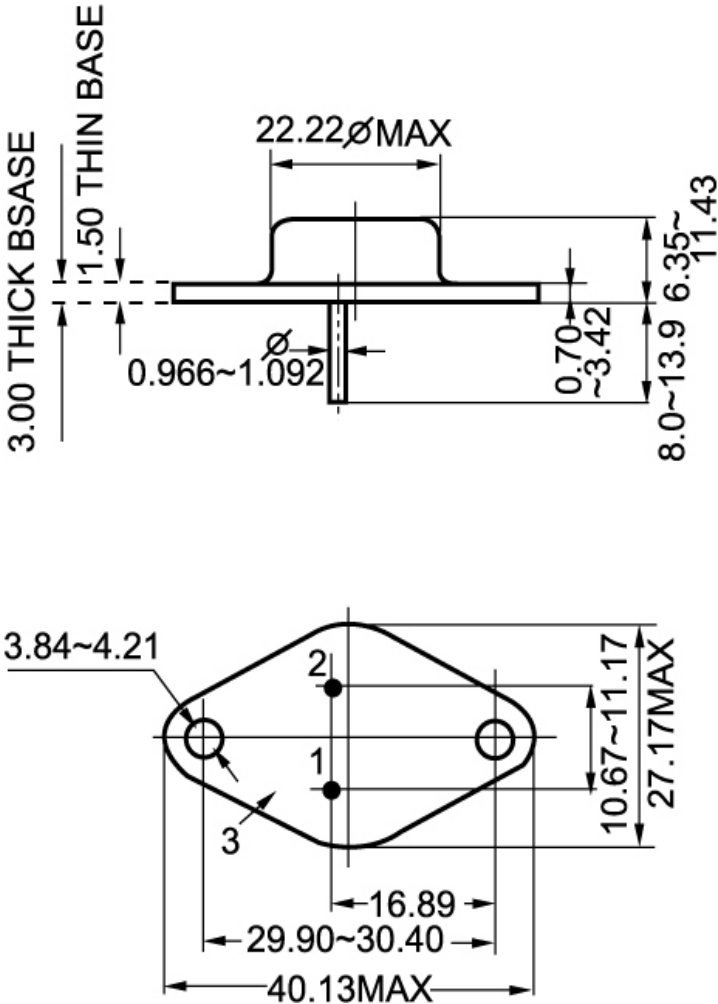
outline dimensions (unindicated tolerance:±0.1mm)
